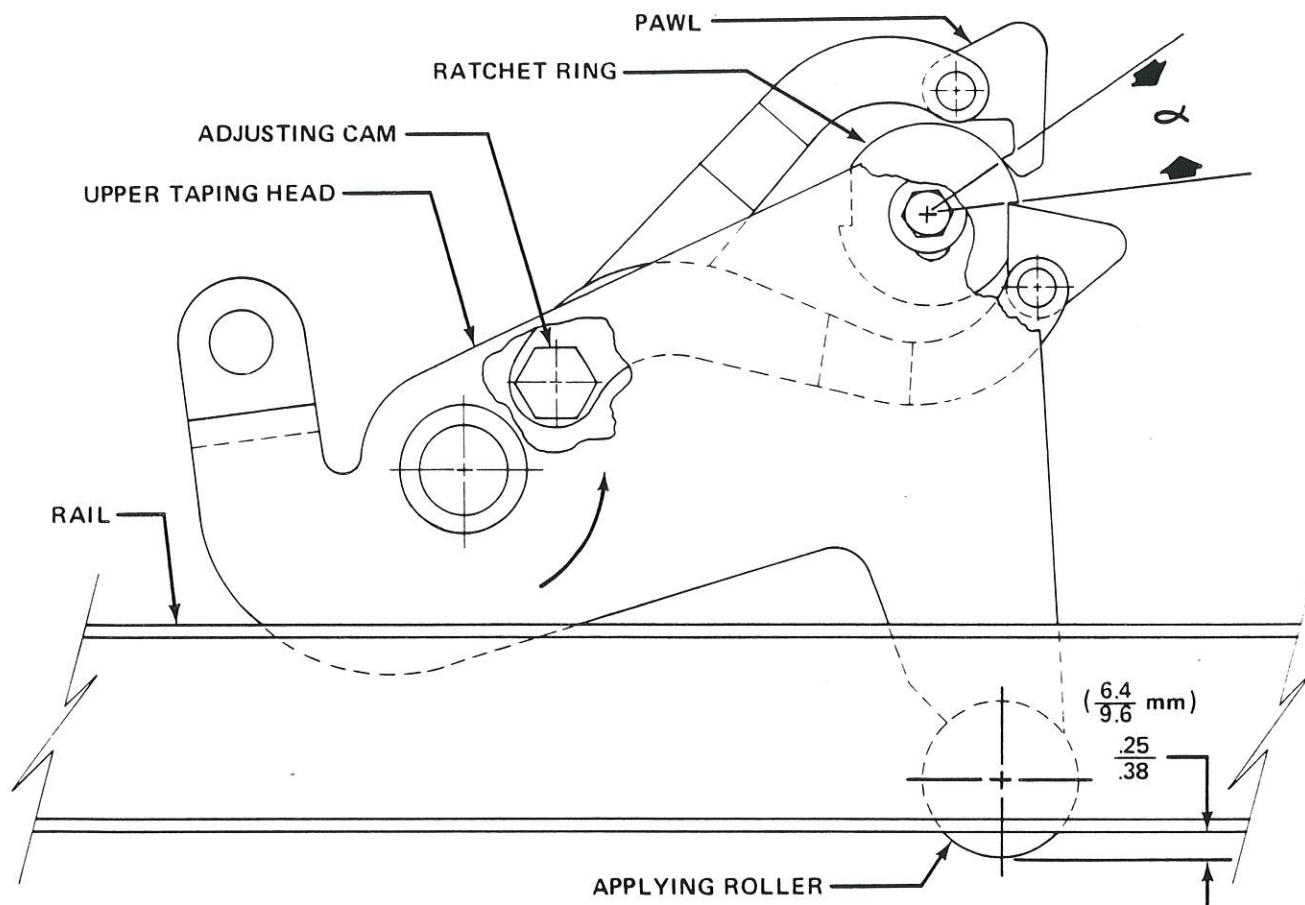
A - TAPE HOLDING ROLLER LATCH POINT
